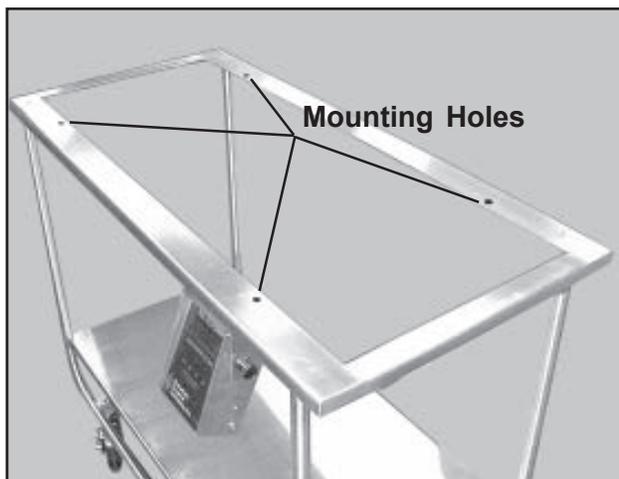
Scale Platform Mounting Holes in the Cart Frame
